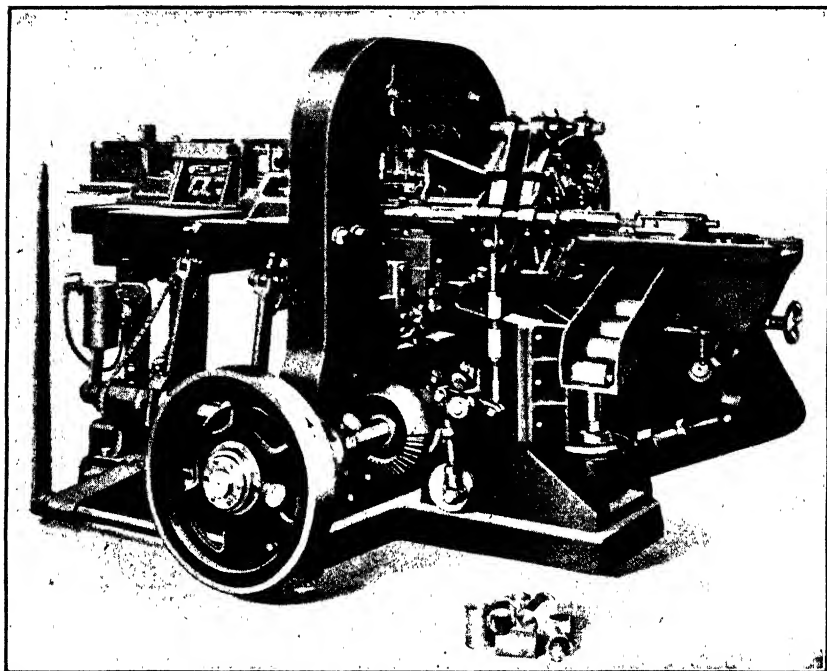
A typical cam ring closing and wedge expanding attachment on the back of an automatic can body-maker arranged to flange both ends of unsoldered bodies.
